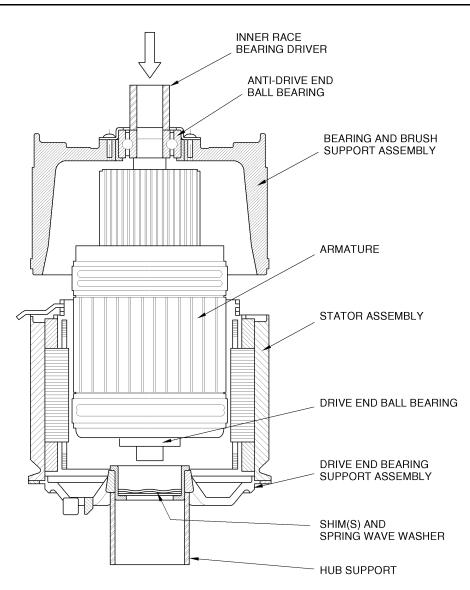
Pressing the Bearing and Brush Support Assembly with Attached Armature into the Stator Assembly
